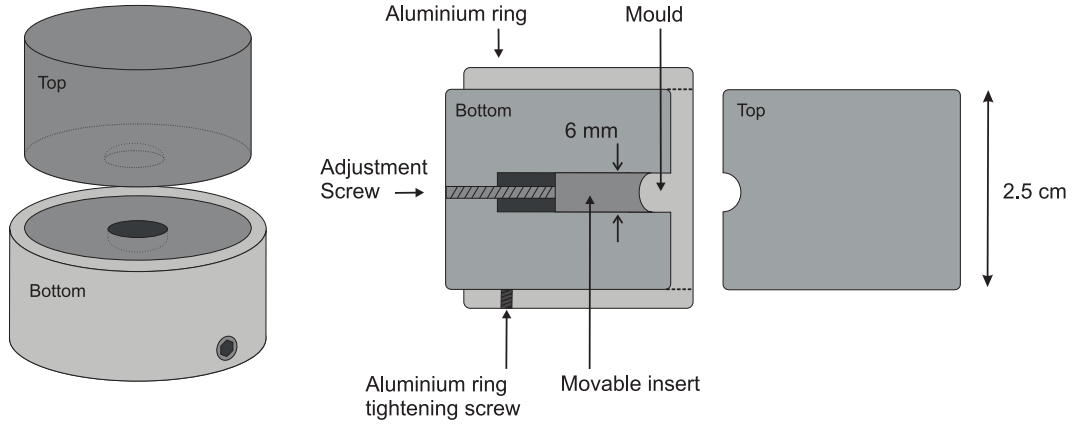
(Left and not to scale) A side representation of the mould. (Right and not to scale) Cross section of the stainless steel mould designed to make glassy pellets for single toroid geometry. The aluminium ring that encapsulates the bottom part of the stainless steel mould, and whose position can be adjusted, ensures that the top and bottom parts are in alignment. Once the glassy melt is poured over the bottom part of the mould both parts of the mould are quickly pushed together.
